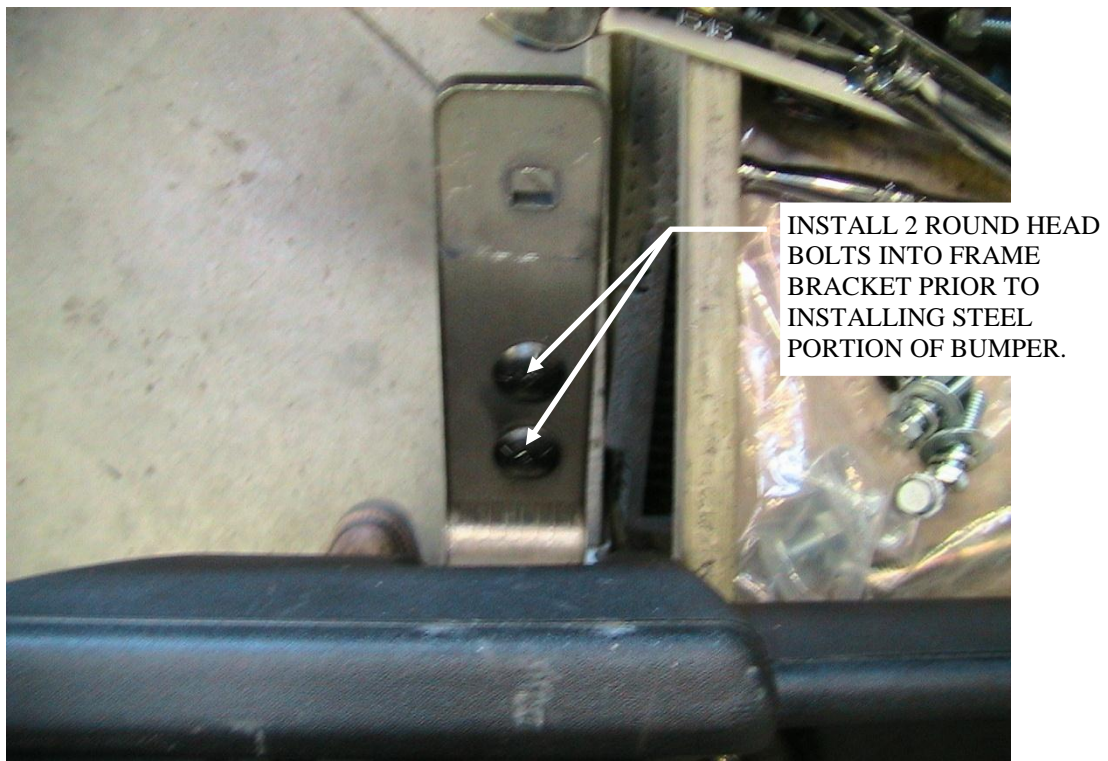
Install 7/16" Round Head bolts into frame bracket prior to installing steel bumper
